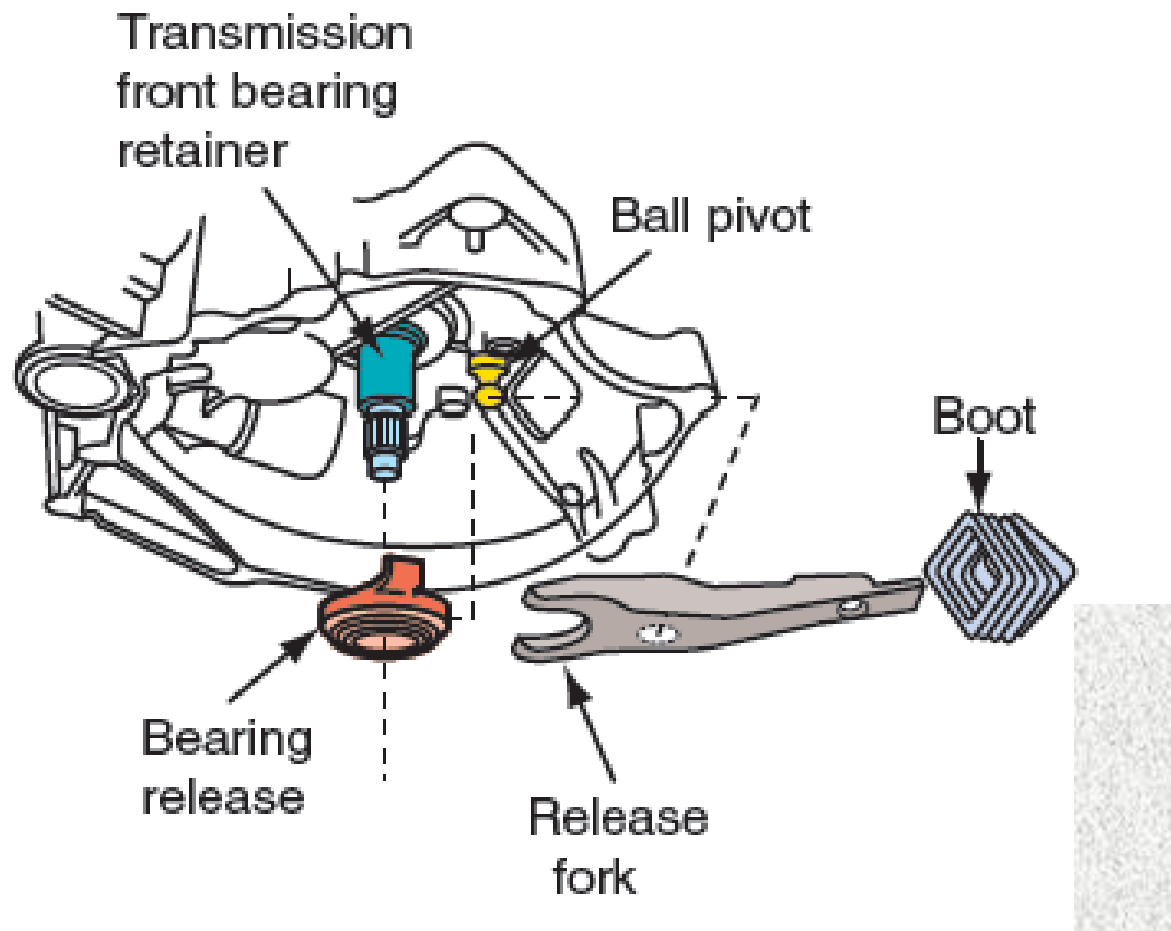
The clutch fork fits between the release bearing and the clutch linkage.
